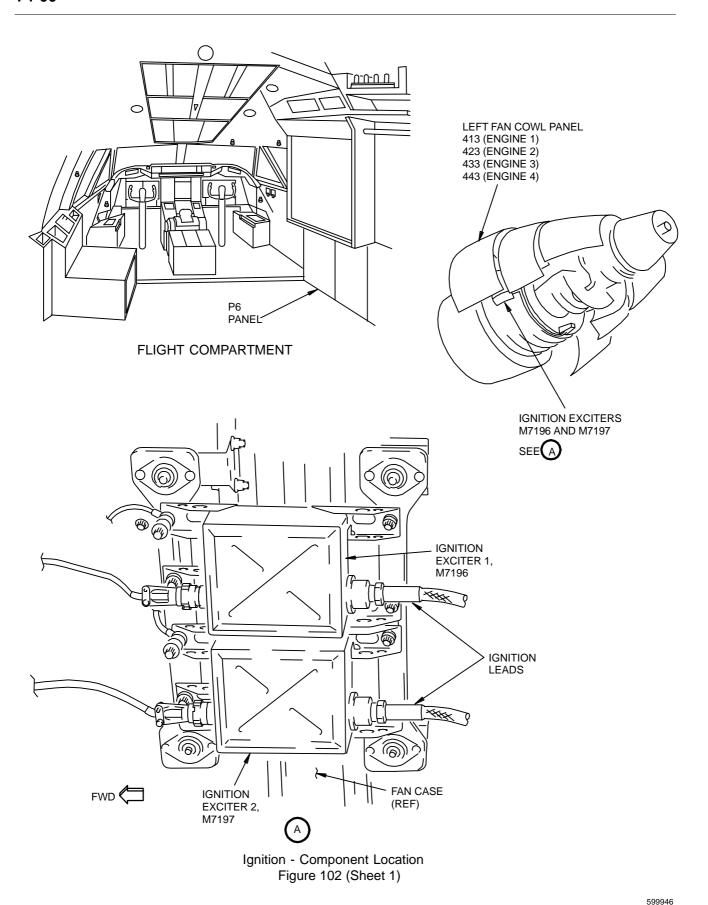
74-00 Ignition Component Location Fig. 102 (Sheet 1)
